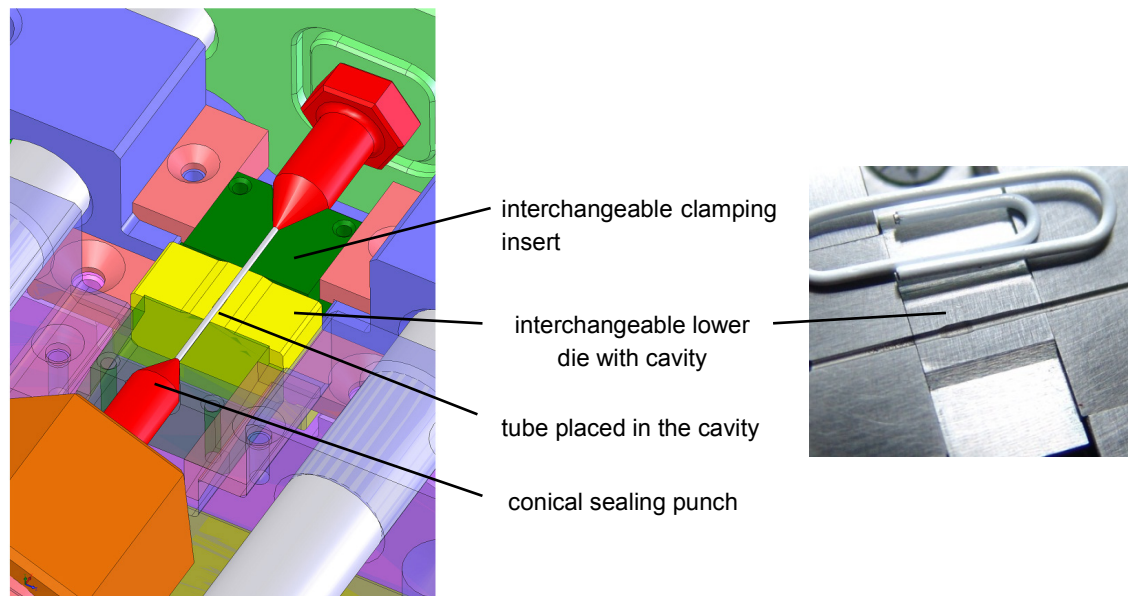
Arrangement of the lower tool components (left) and lower die cavity with size comparison (right)
